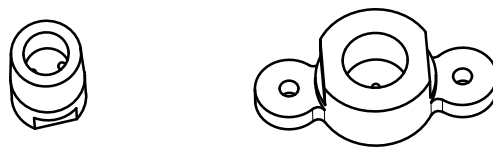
Technical drawing: isometric view. Bottom part (left), top part (right).
